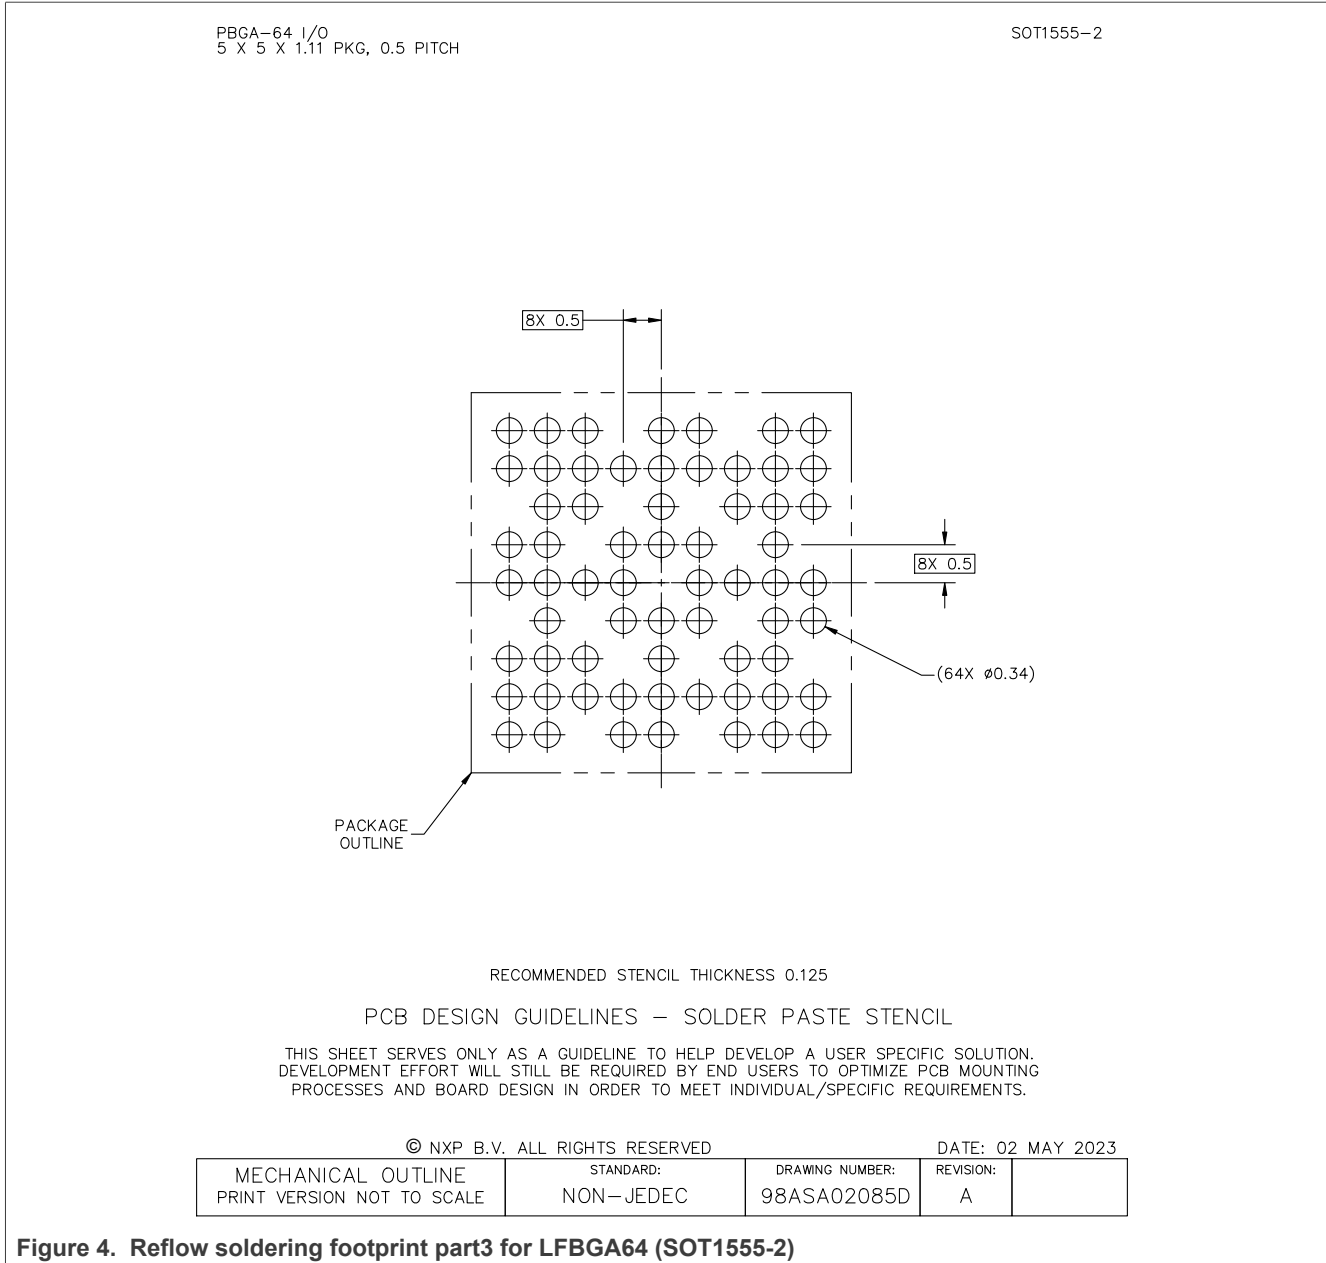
Reflow soldering footprint part3 for LFBGA64 (SOT1555-2)
